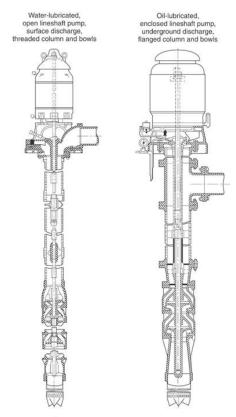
Water-Lubricated and Oil-Lubricated Shaft Pumps.
